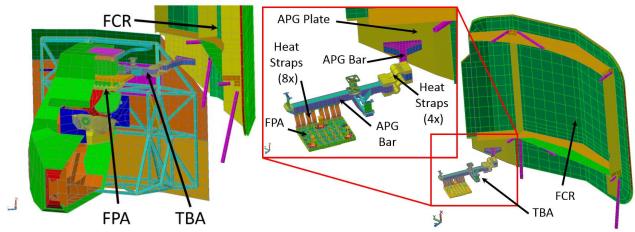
WFI Cutaway View (SRR GSFC Design): cutaway view of WFI instrument showing the Focal Plane Assembly, Thermal Bus Assembly, and Facility Cryogenic Radiator
